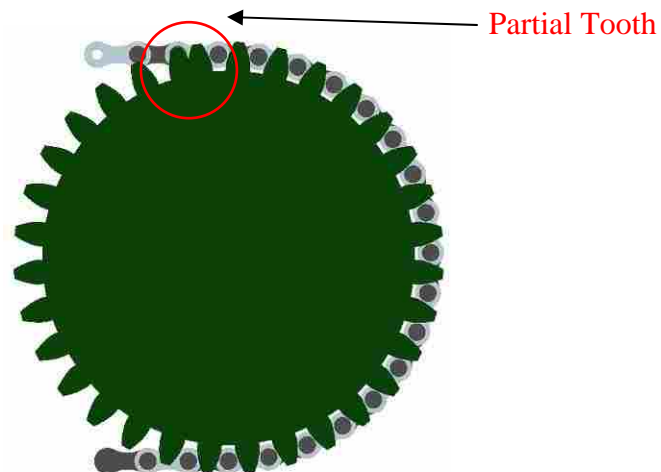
Non-integer Tooth Problem That Exists in PECVTs Requiring a Correction (Retrieved from <http://cvt.com.sapo.pt>)
